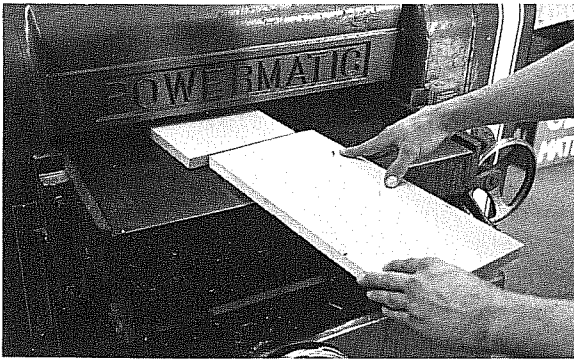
Butt short pieces end to end to feed them through the surfacer. This produces a more uniform thickness and keeps the boards moving. Never put a board less than 12 inches (300 mm) long in a surfacer.
